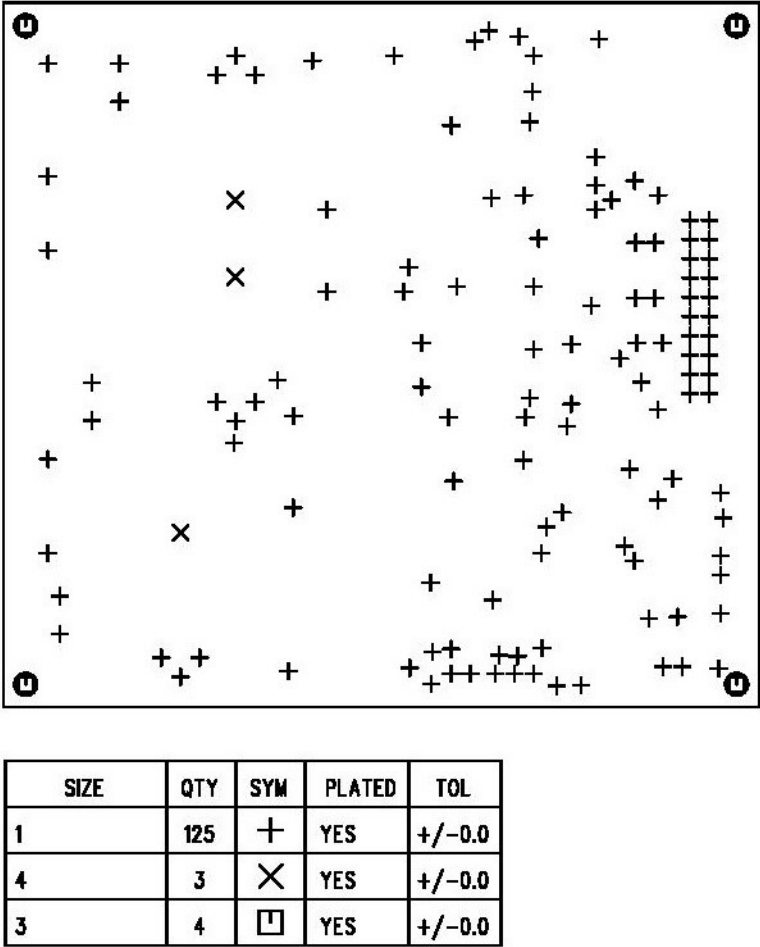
Miniature MOSFET Gate Control Board Drill diagram.
